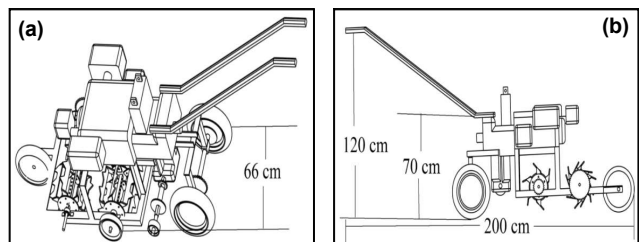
Line diagram of (a) isometric and (b) side view of rotor weeder
